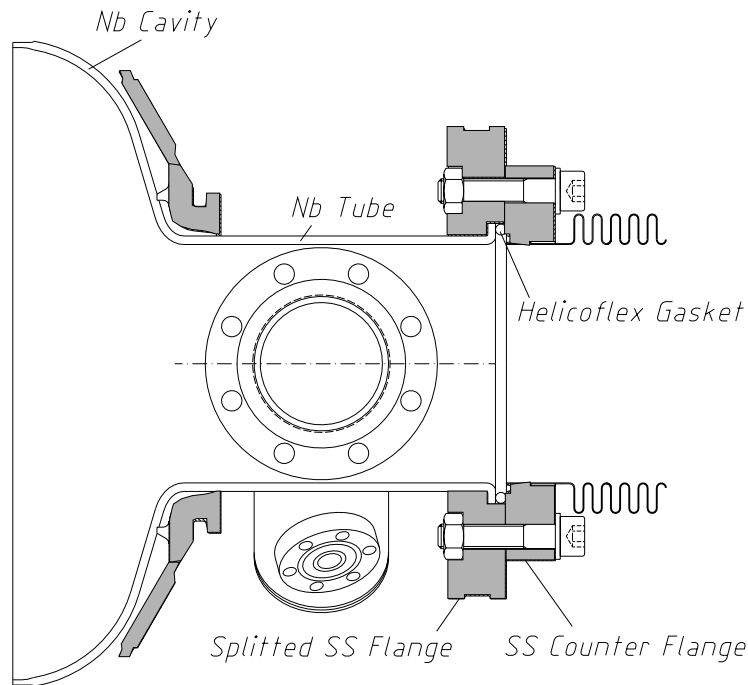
Present flange design of the niobium cavities for TESLA/TTF.
